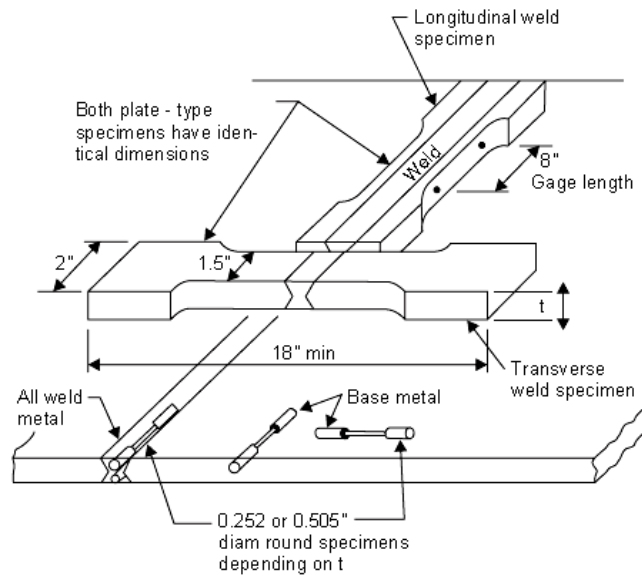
Typical test specimens for evaluation of welded joint (inch)
